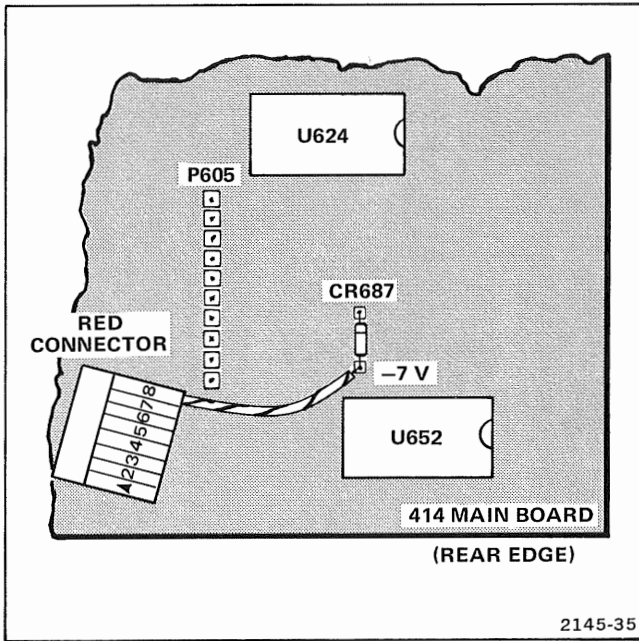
Connecting white-red wire to -7 V on 414 Main Board.
